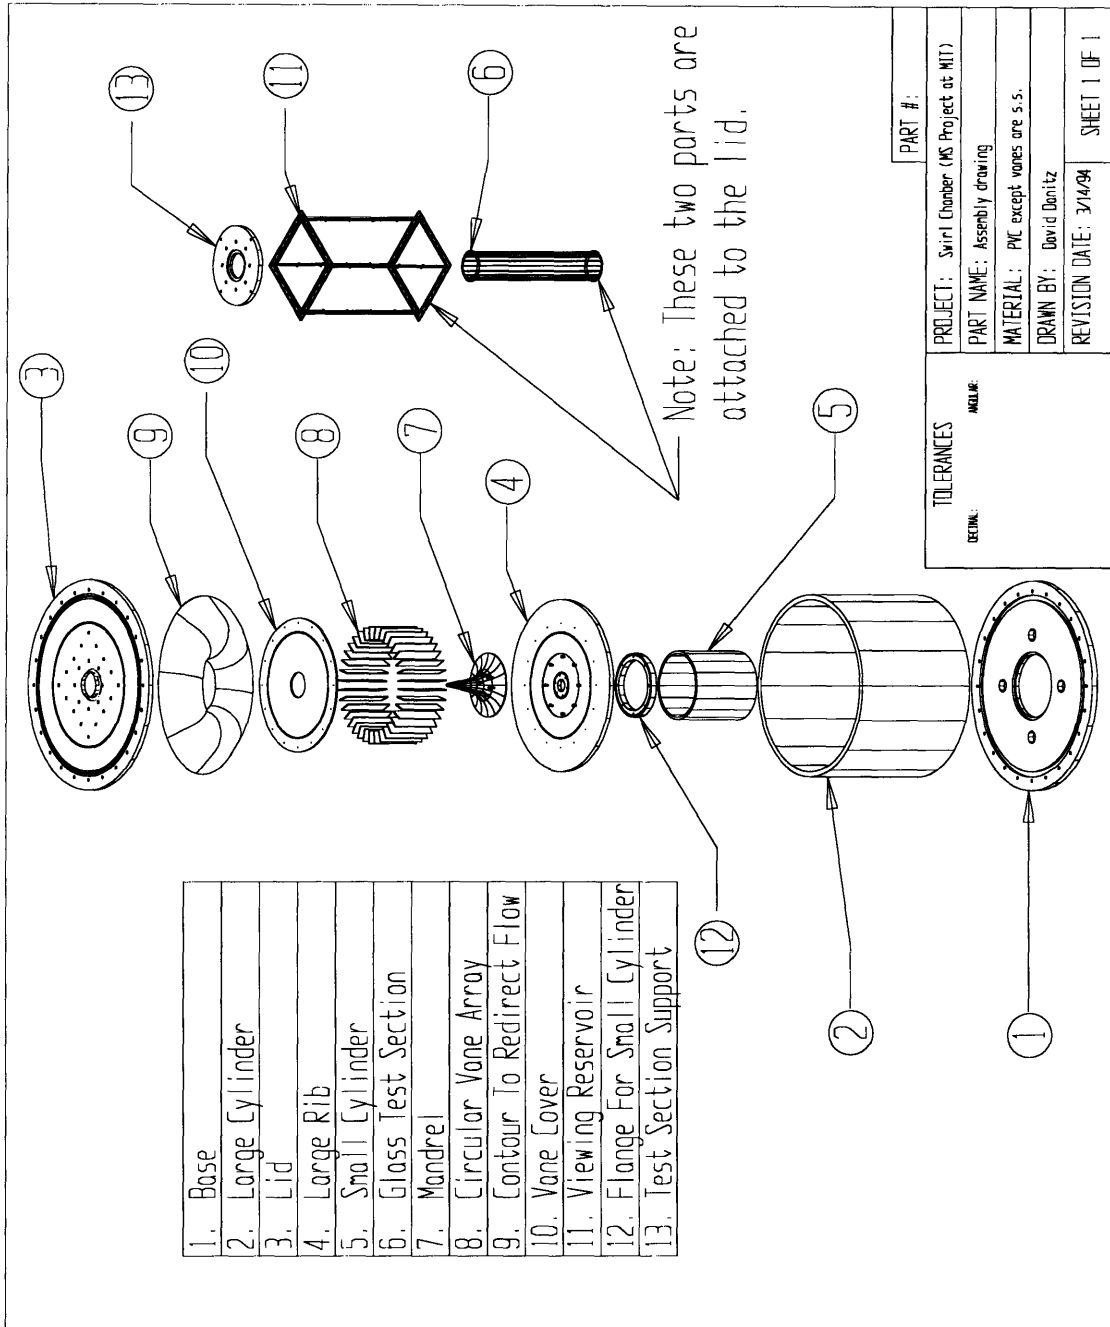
Assembly drawing of the swirl chamber. The parts are drawn to scale.
